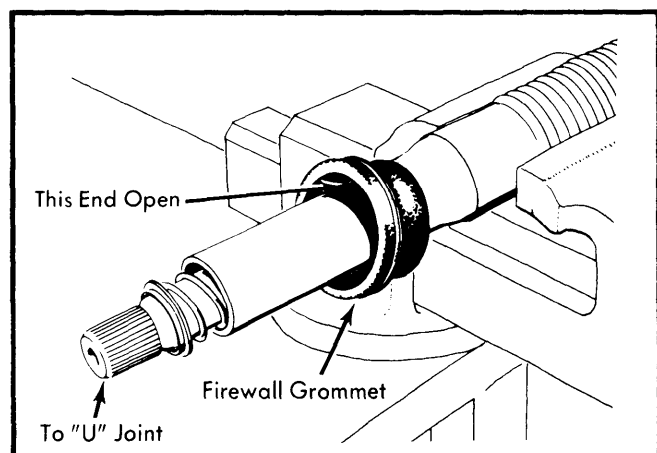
New Rubber Grommet Being Installed on Steering Column
